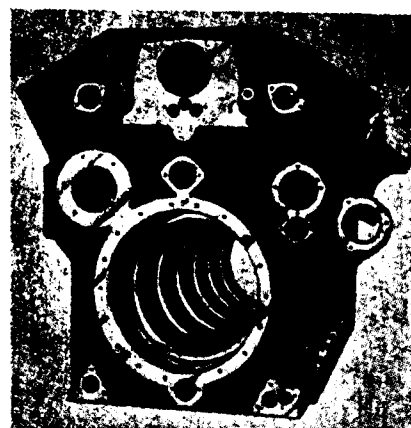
Crankcase of a 12-V engine showing the crankshaft bearing bores.
